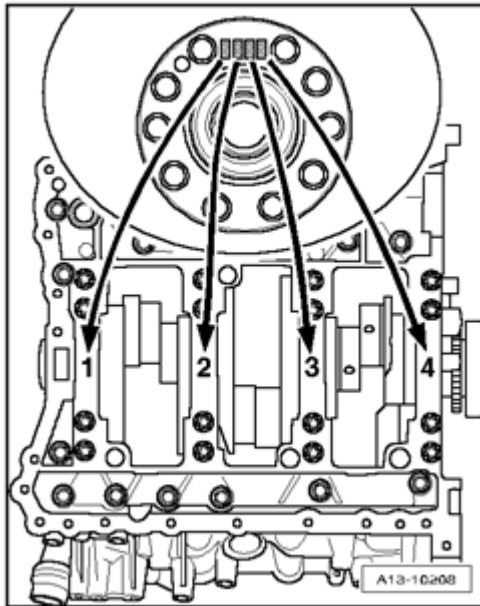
Allocation Of Crankshaft Bearing Shells For Guide Frame
